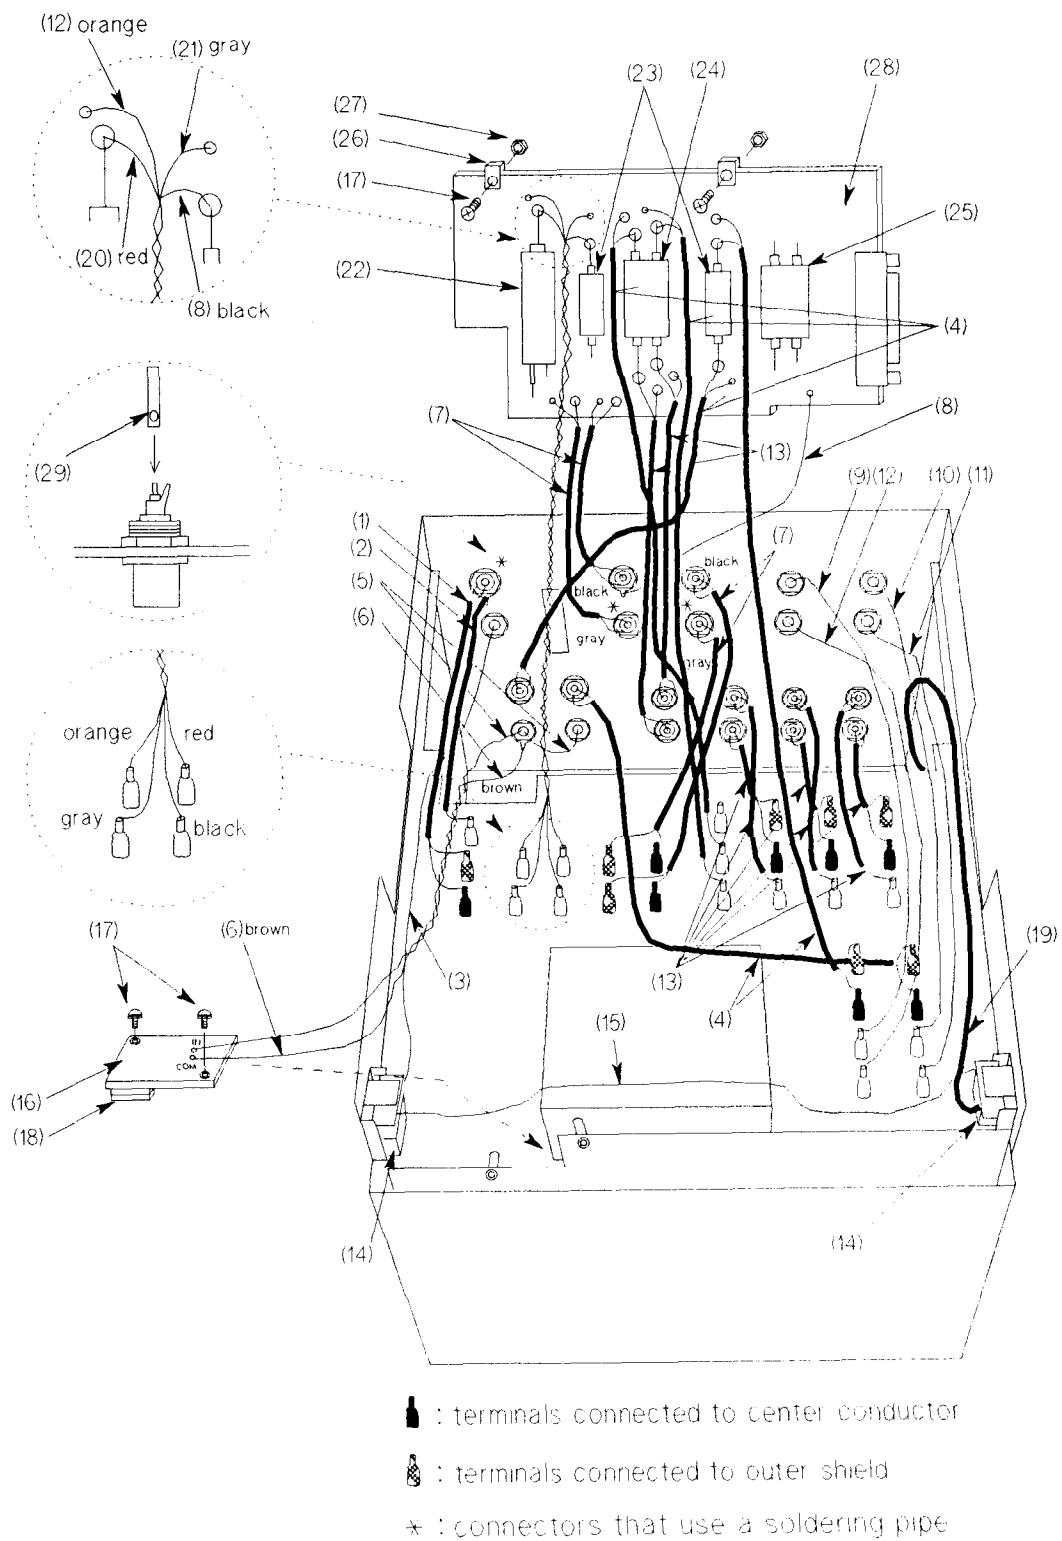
View of Cable Connections in the Test Fixture without Option 300
